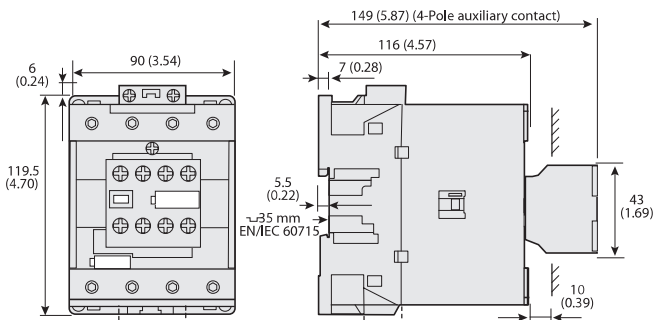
100-E80 4-Pole Contactors with Side-mounted Auxiliary Contact
